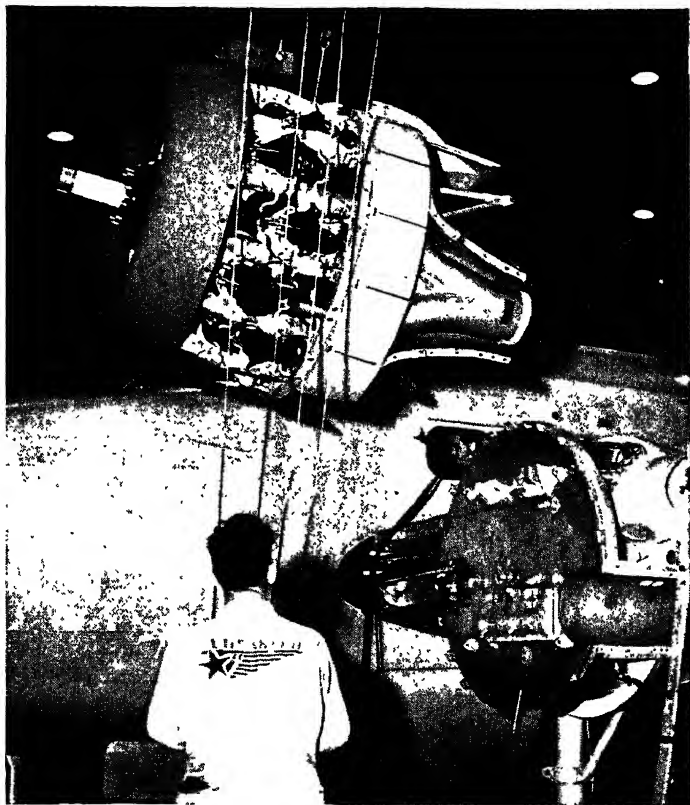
Power-plant unit being moved into position for installation in a twin-engine bomber. (*Lockheed Aircraft Corp.*)
